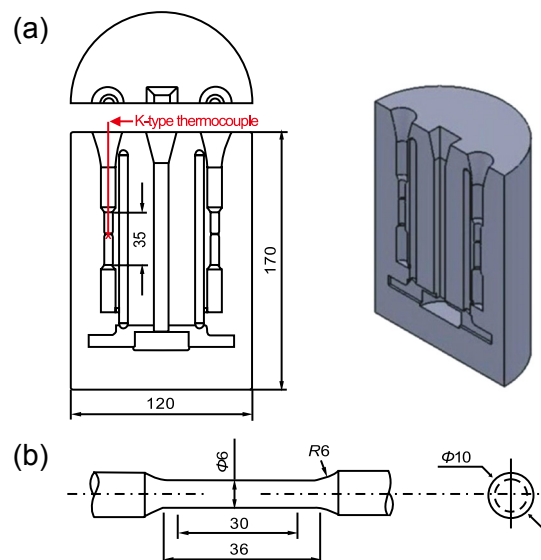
Cast iron mold and position of thermocouple used for cooling rate measurements (a), and tensile test sample dimensions (b) (unit: mm)
